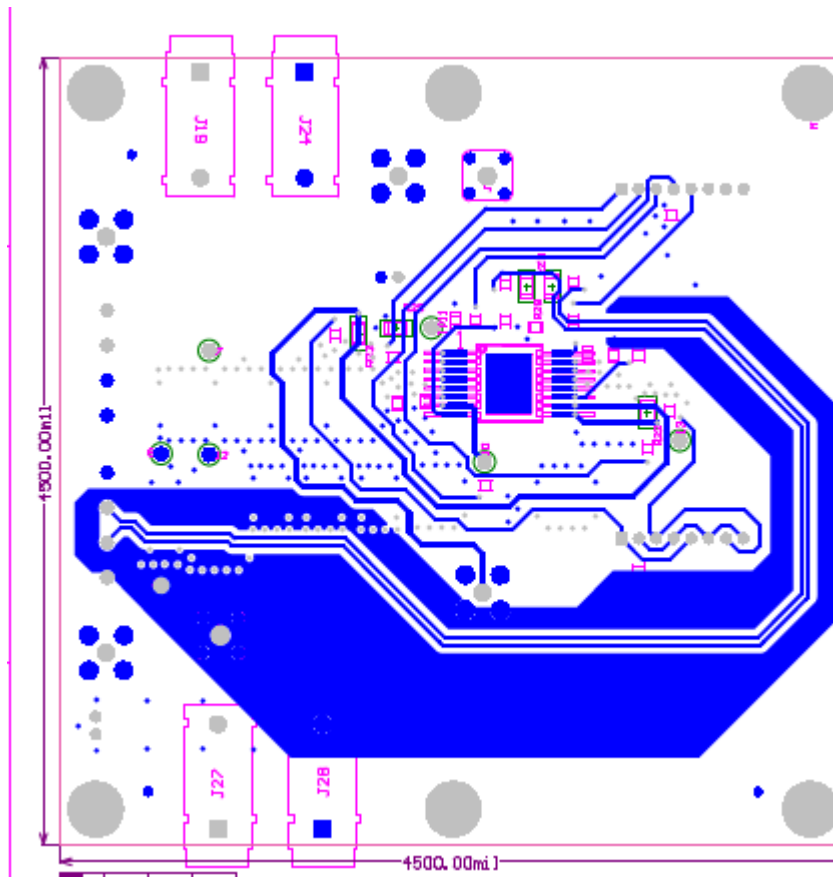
Board Layout - Fourth Layer (Bottom Layer)
